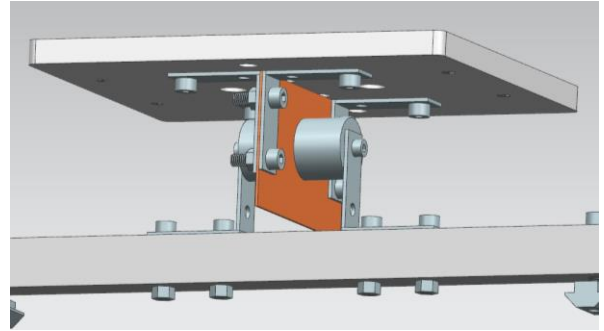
Damping assembly with the electromagnets and copper plate. Only the bottom plate of the pendulum structure is shown here.
